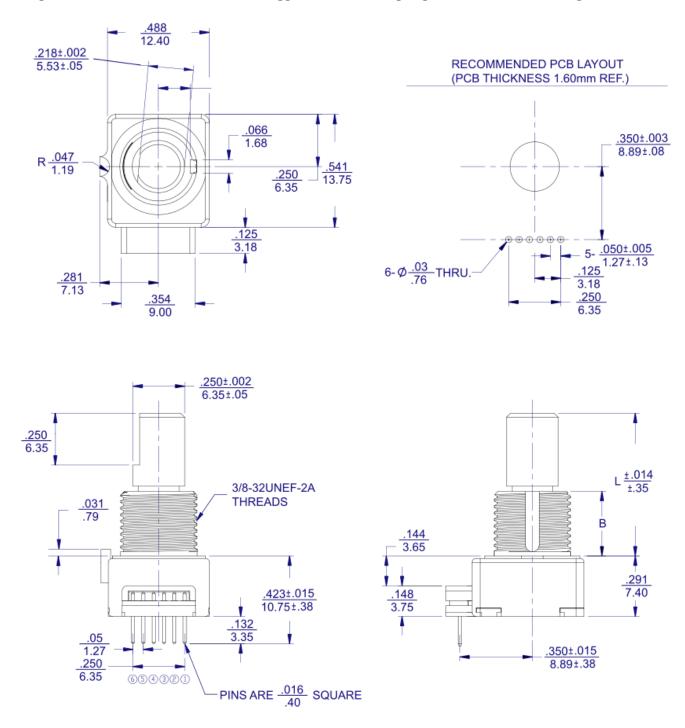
291V1...A – Without Schmitt Trigger, Without Locating Lug, .050" Pitch Pins Facing Rear
